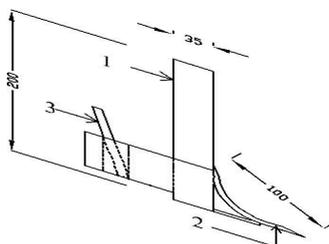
Isometric view of shovel type furrow opener of developed bullock drawn dry paddy seed cum fertilizer drill
